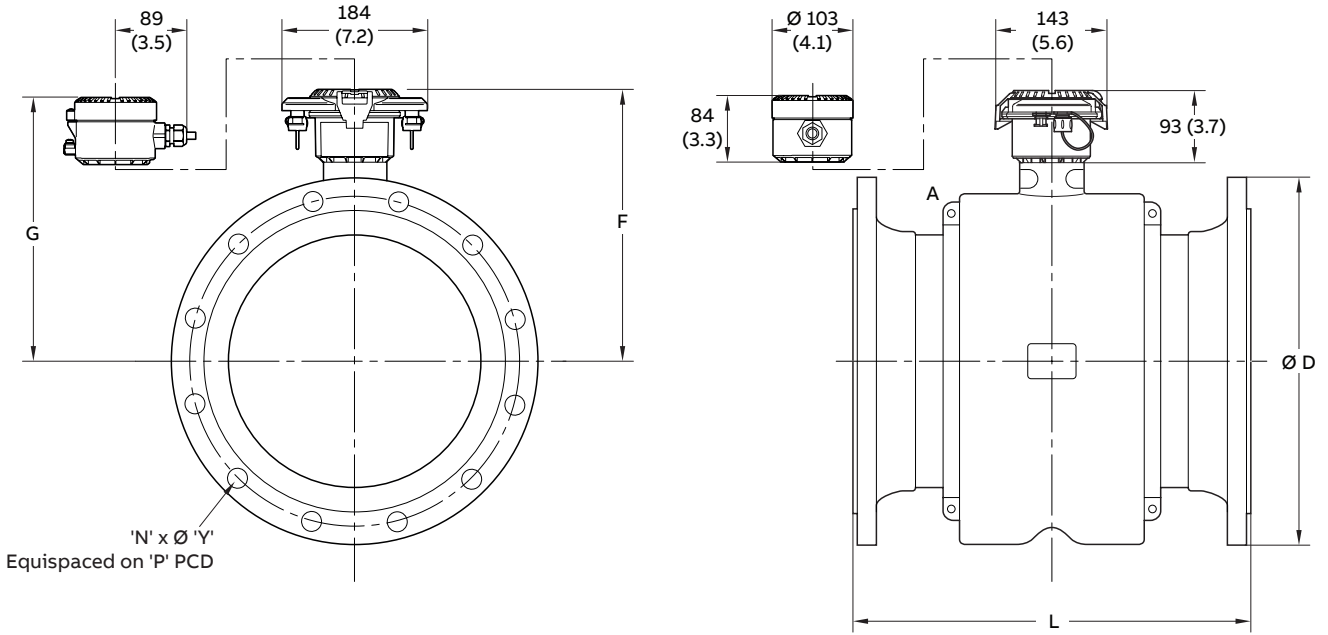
F-style sensor – DN250 to 400 (10 to 16 in.)
